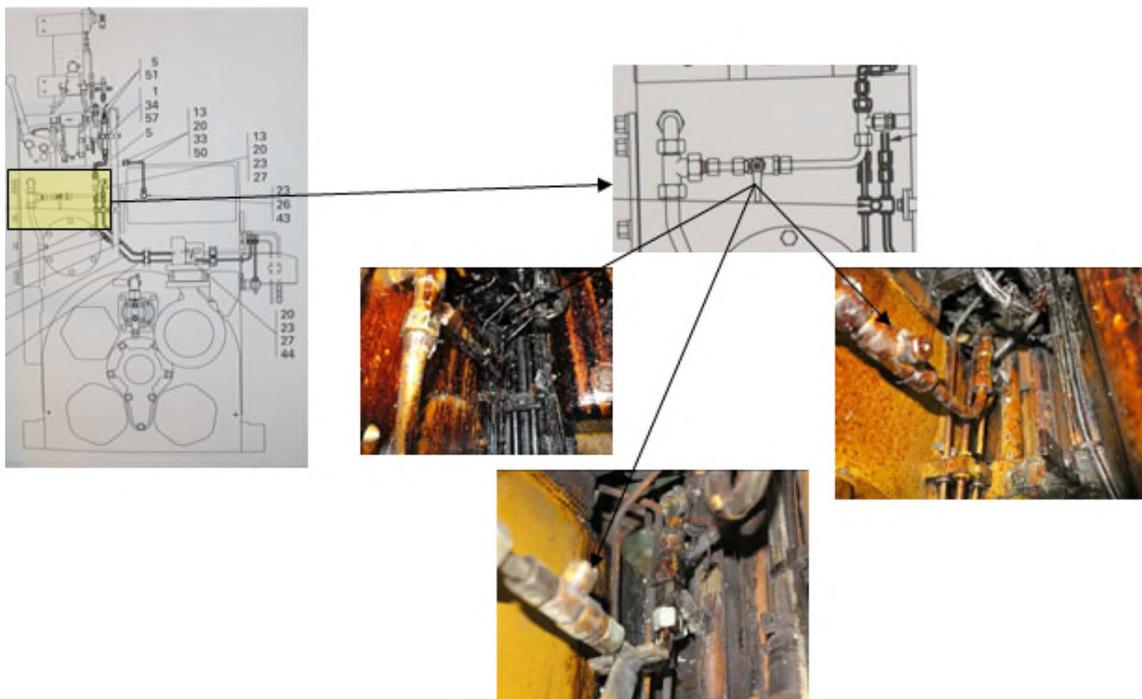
Fuel oil pressure gauge supply lines on AE1, 2 and 3 indicating missing valve handle
